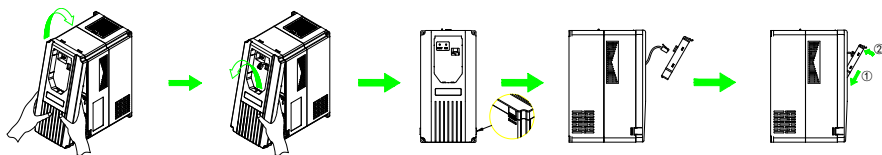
Steps for Disassembly and Installation of Cover Plate of Hope530PM0.75T4~Hope530PM7.5T4 Models
